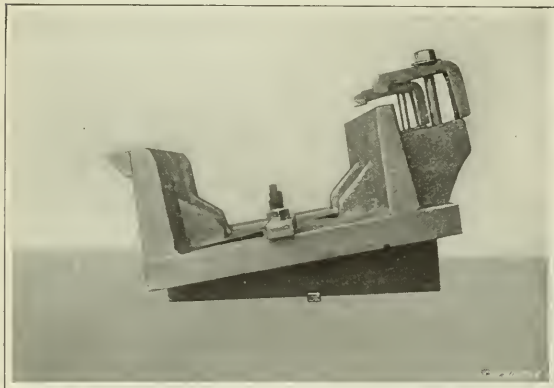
Fixture held on Tapered Base to provide for planing Carriage Cap Bearing at Required Angle
